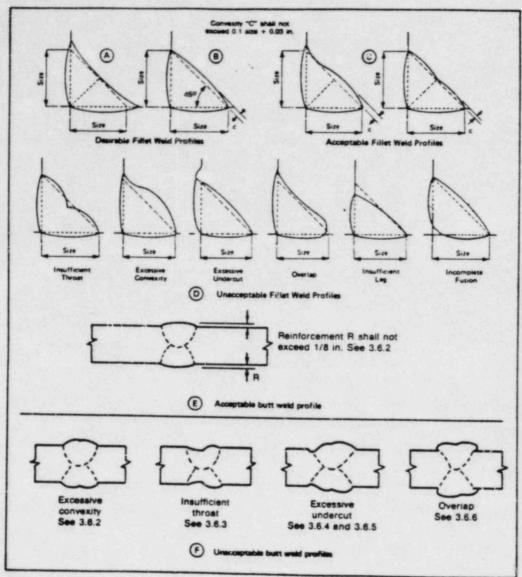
Acceptable and unacceptable weld profiles.
